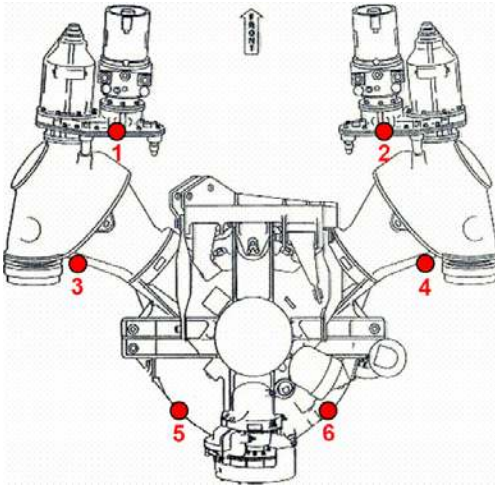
Top view of helicopter transmission gearbox assembly. The image highlights examples of possible locations for mounting vibration-measuring accelerometers; the locations of focus for this thesis are similar to locations 5 and 6 in the image. Reproduced from Keller and Grabill (2003)
